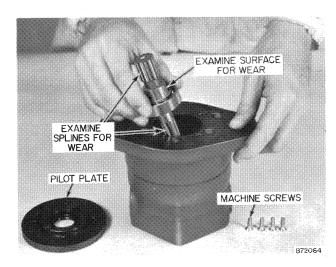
Removing Driveshaft - Ball Bearing Assembly
